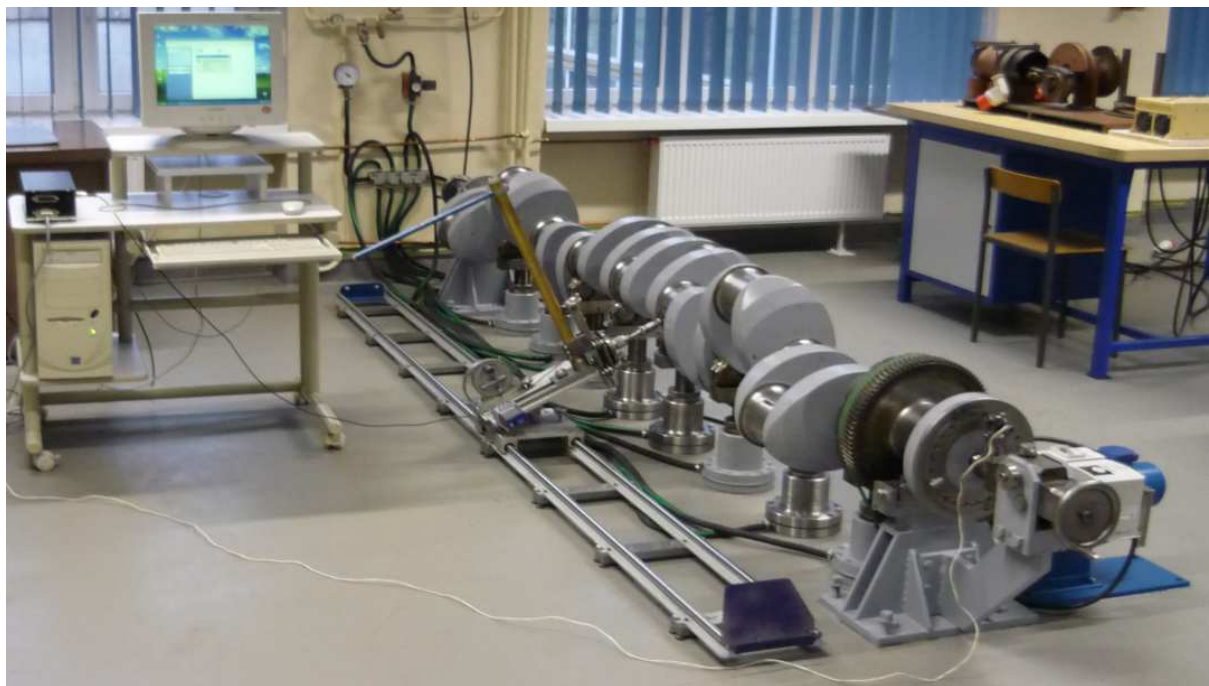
A test bed for geometrical deviation measurements of crankshafts, equipped with a system of shaft elastic support.
